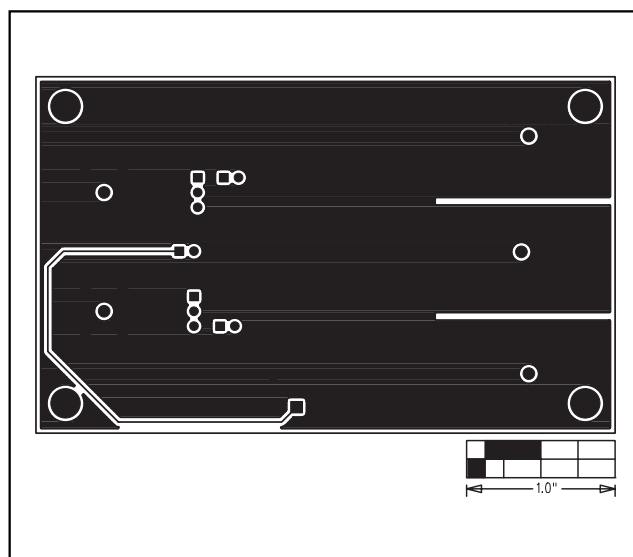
MAX7443 EV Kit PC Board Layout—Solder Side
